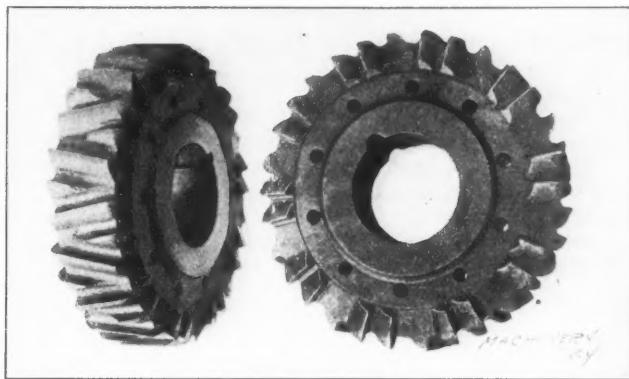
General Appearance of Hellgren's New Type of Milling Cutter.
